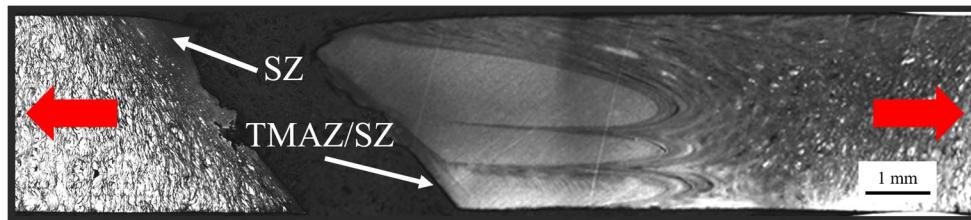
A cross-section of the HT FSW joint was obtained with a welding speed of 100 mm/min after the tensile test (red arrows point out the tensile load)
